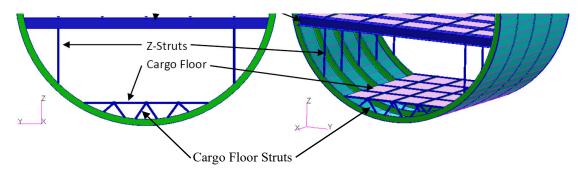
Cargo Floor Strut fixing the Cargo Floor Crossbeam on the Aircraft Frames.
